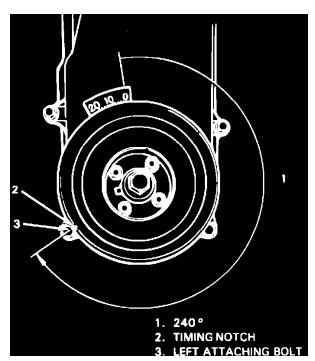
Crankshaft pulley alignment w/left side timing belt cover bolt
